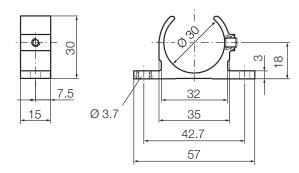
Mounting bracket BTL6-A-MF01-A-43
